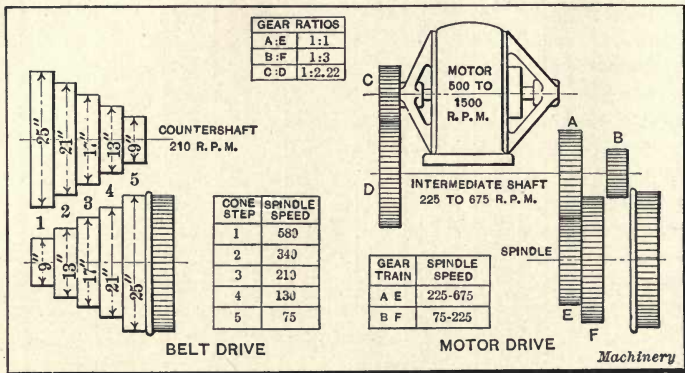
Comparison of Belt and Motor Drive of Engine Lathe
